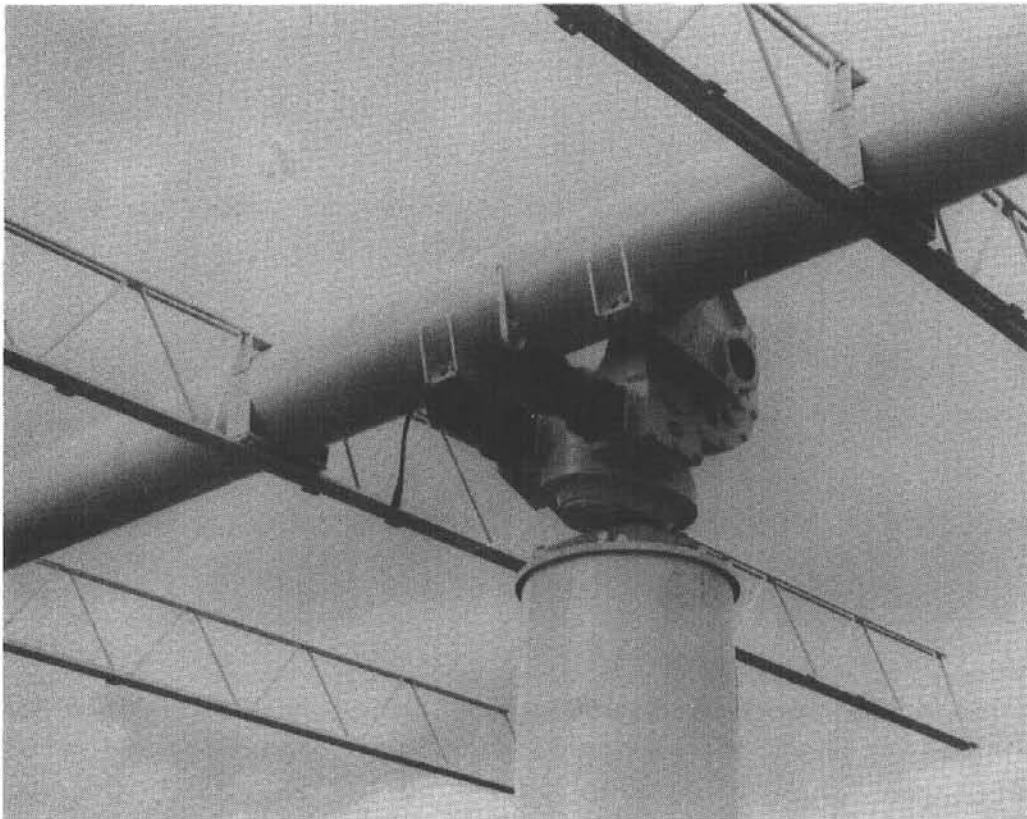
Installation of Cross Beams and Elevation Tube to MMC Drive Unit
